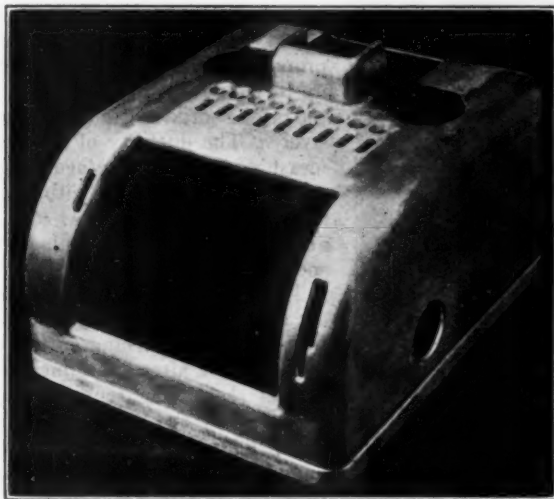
DIE-CAST ADDING-MACHINE FRAME, WEIGHT 3.38 LB.
